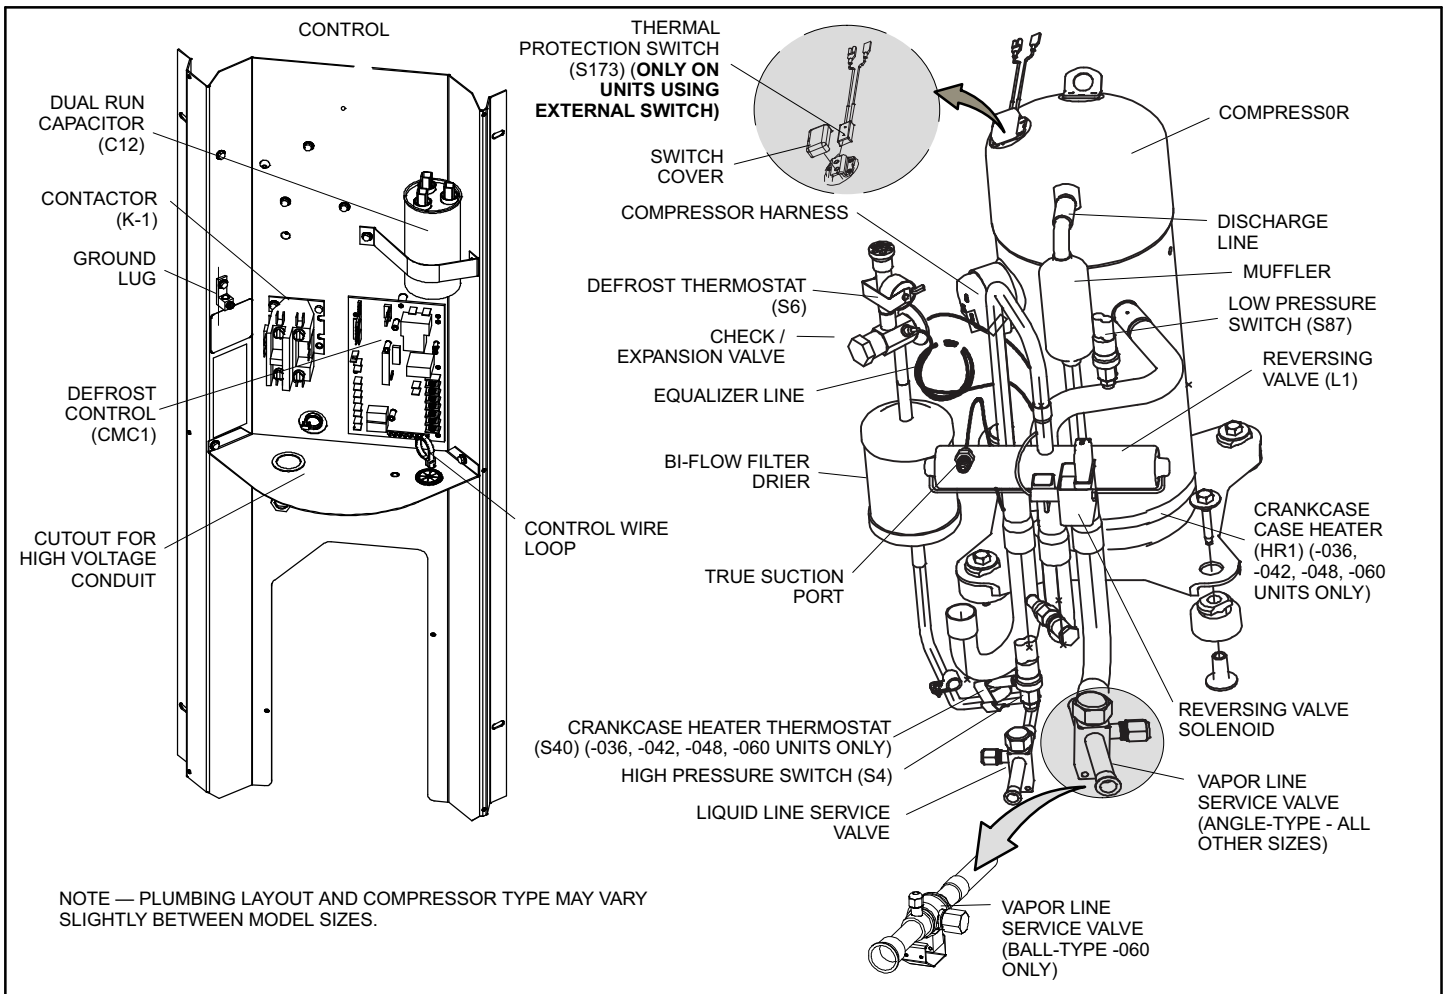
Typical Unit Parts Arrangement (14HPX-XXX-230-017)
